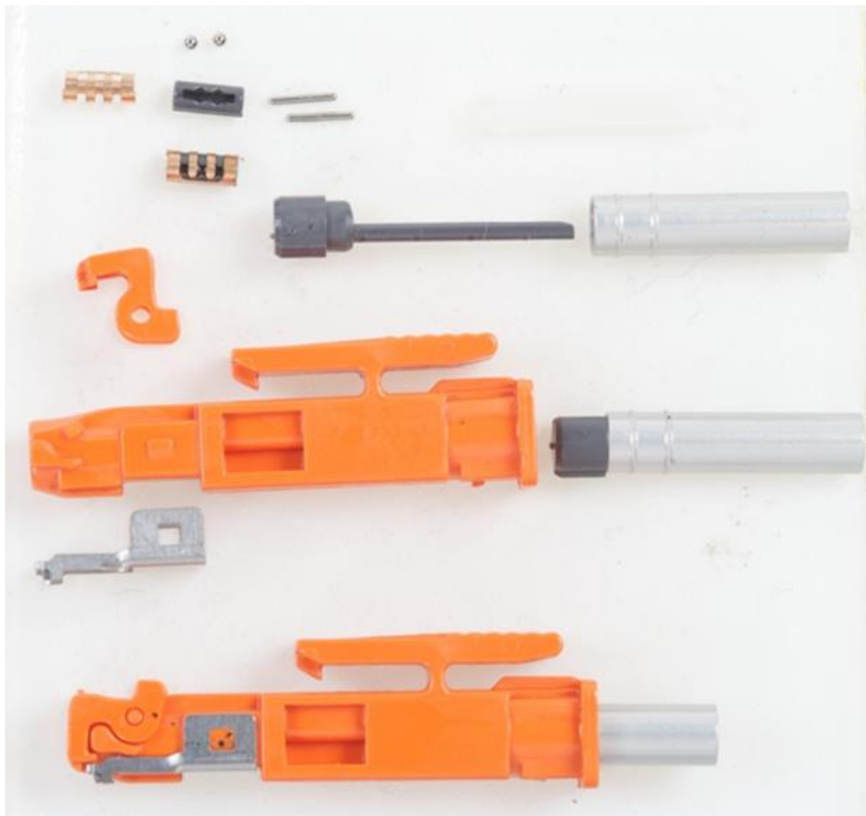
Final subassembly components and final assembled connector ready for fibre termination.
